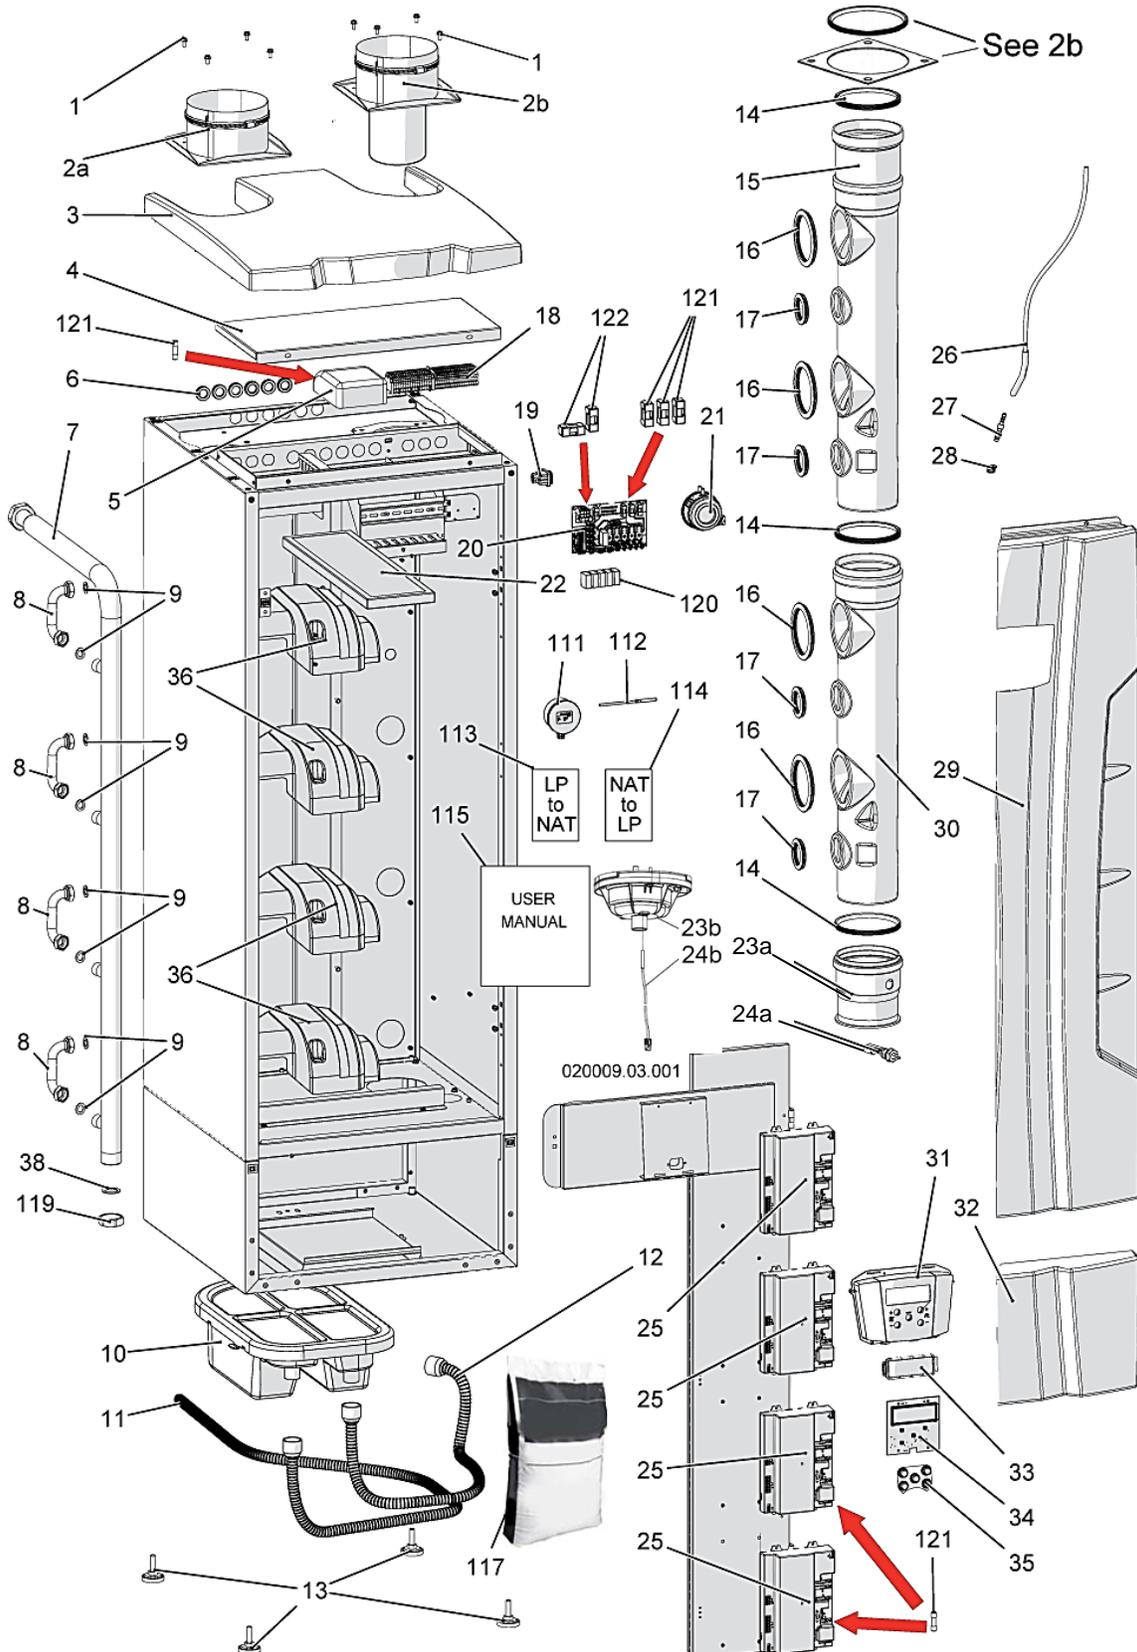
AM 750/1000 General Assembly Parts Drawing (1 of 2)
